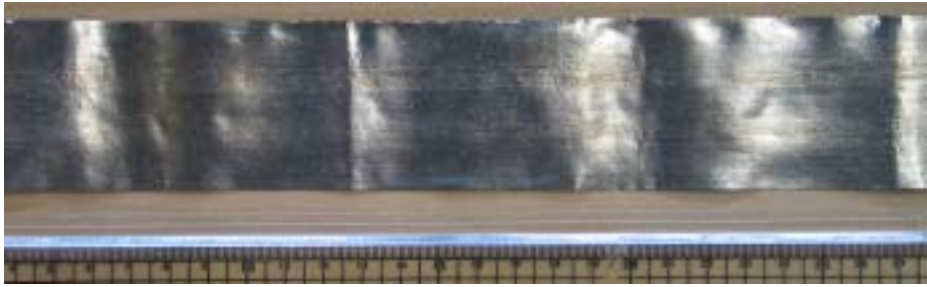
Uranium foils produced by cooling-roll casting apparatus.
